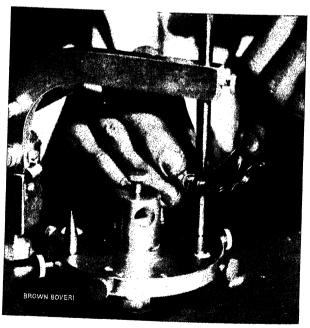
Soldering a hook to a dental steel plate by means of the soldering and welding apparatus, Type TLsk 3.
